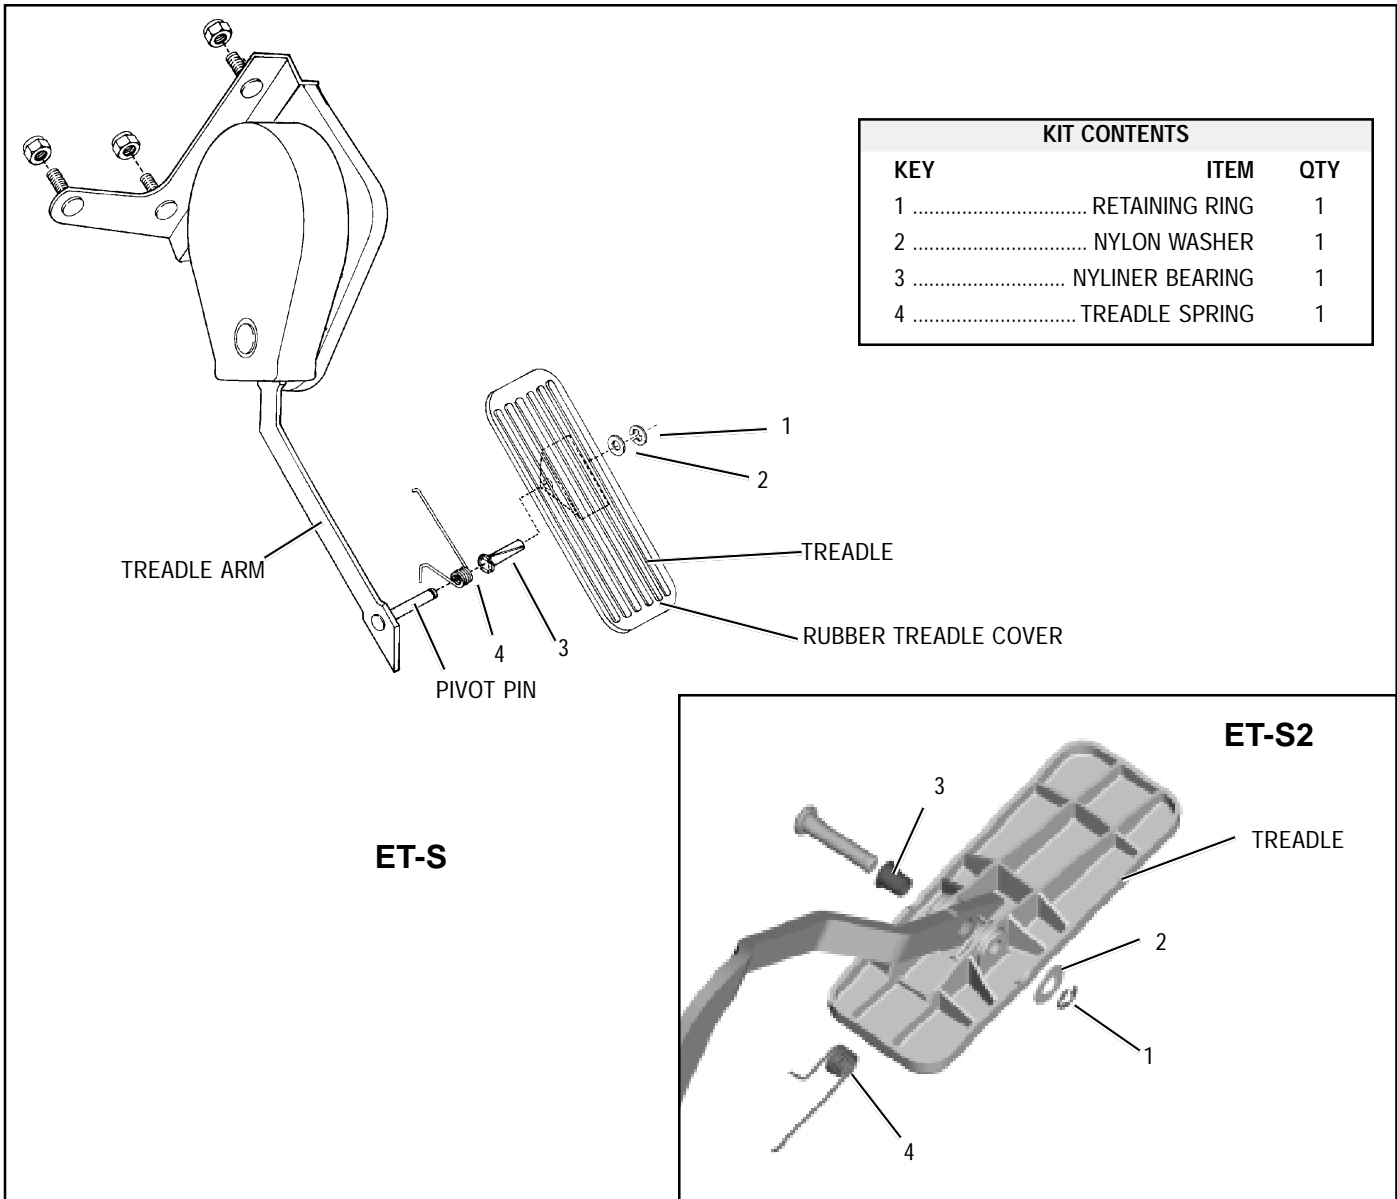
ET-S & ET-S2 EXPLODED VIEWS
